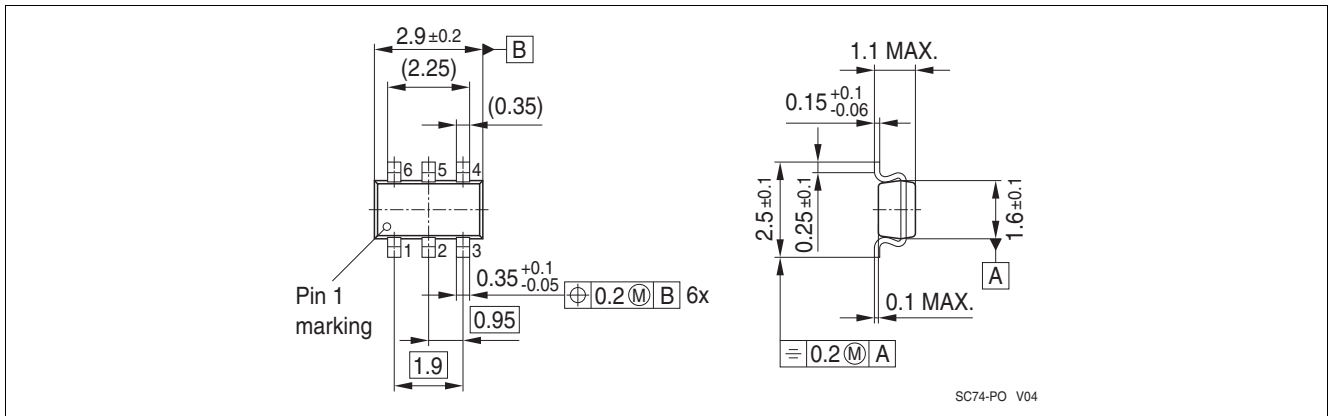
Package Outline for SC74 (dimensions in mm)
